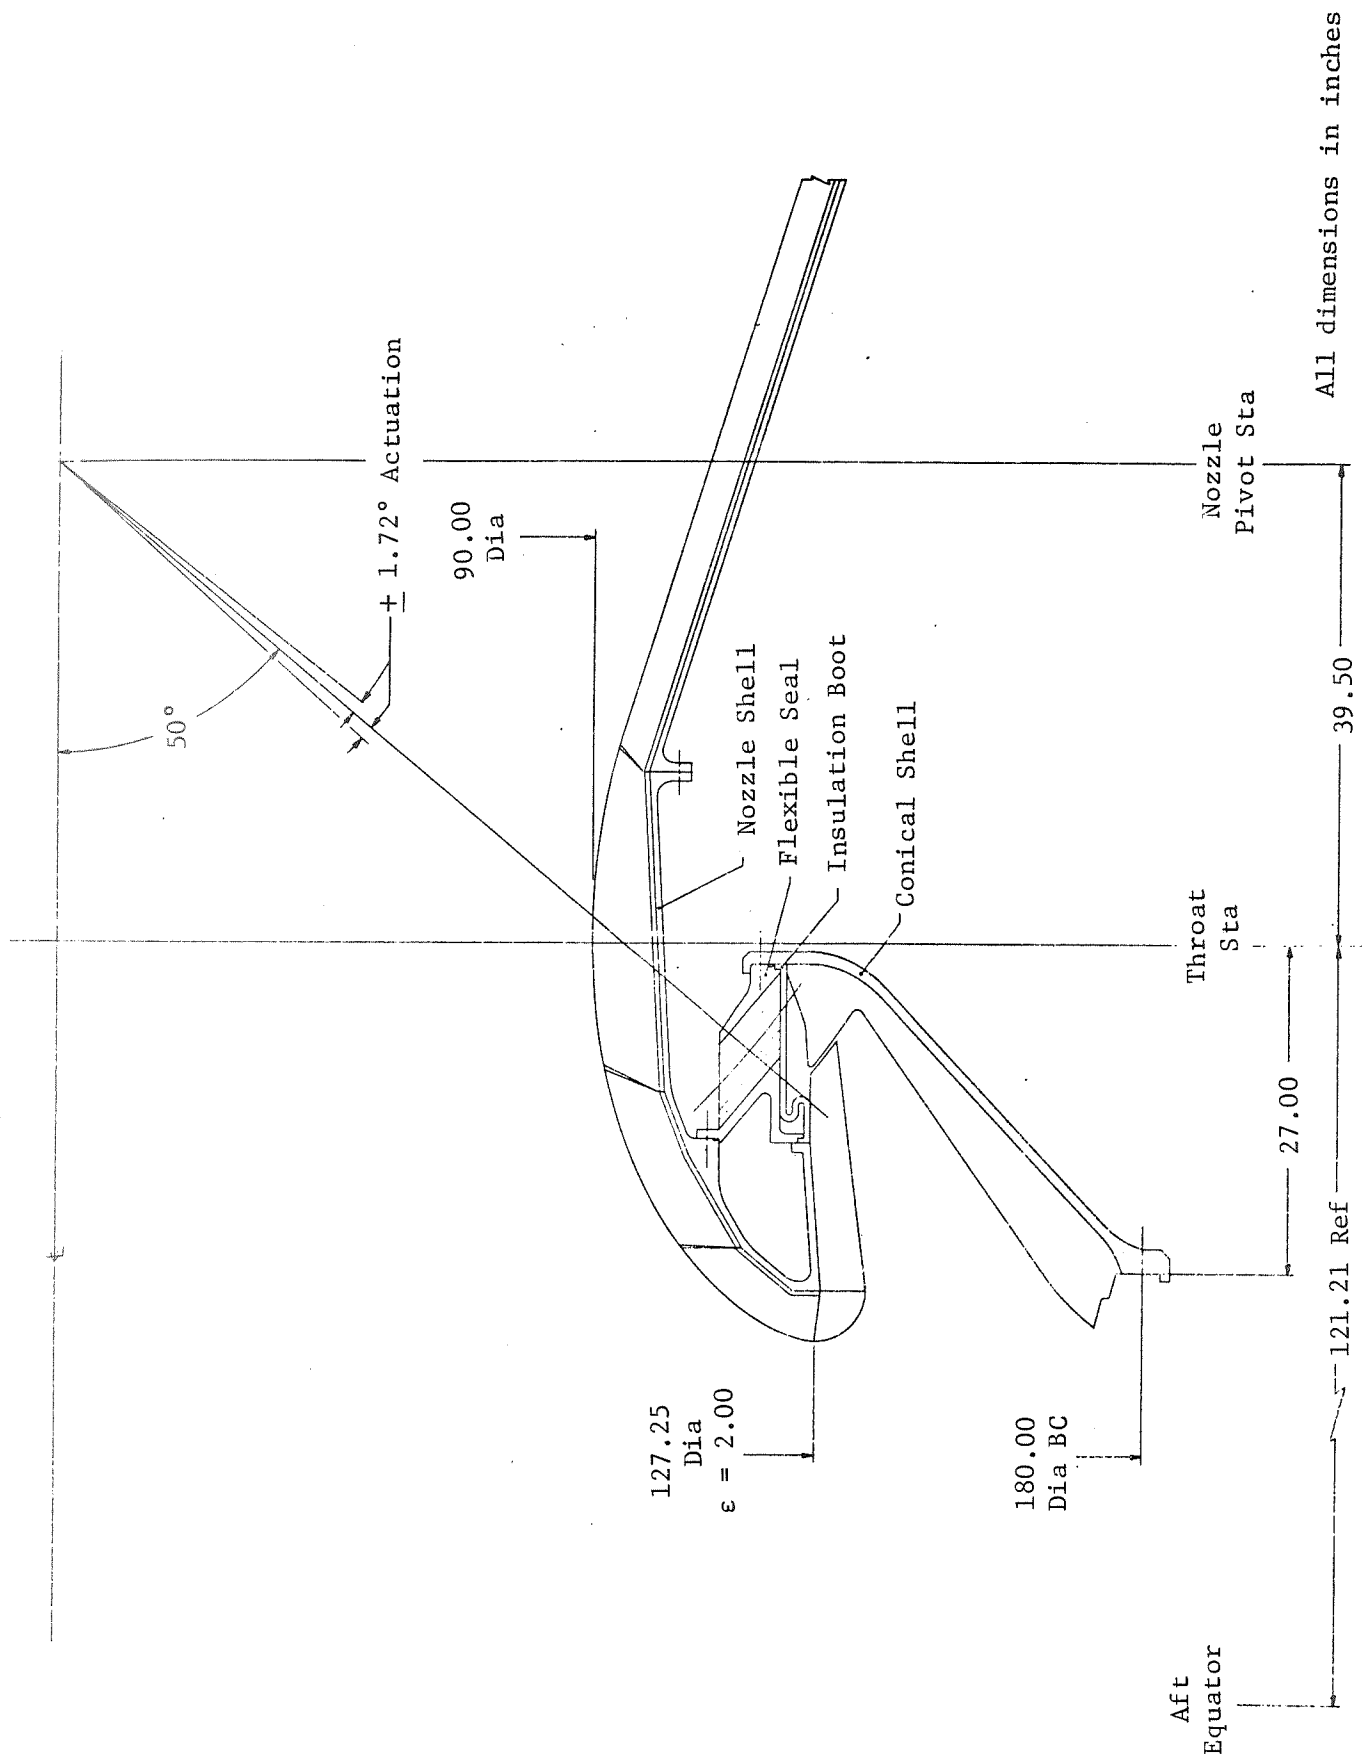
Nozzle Design with Aft Pivot Flexible Seal
